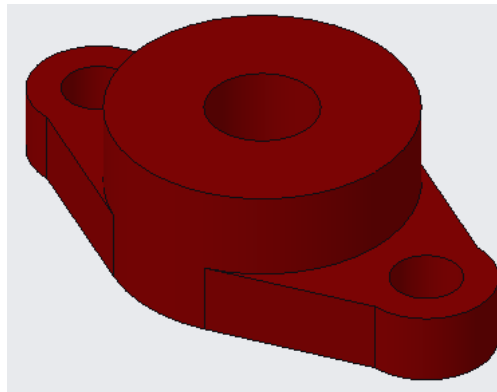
CREO representation of the 2 bolt flange 25mm internal diameter bearing
